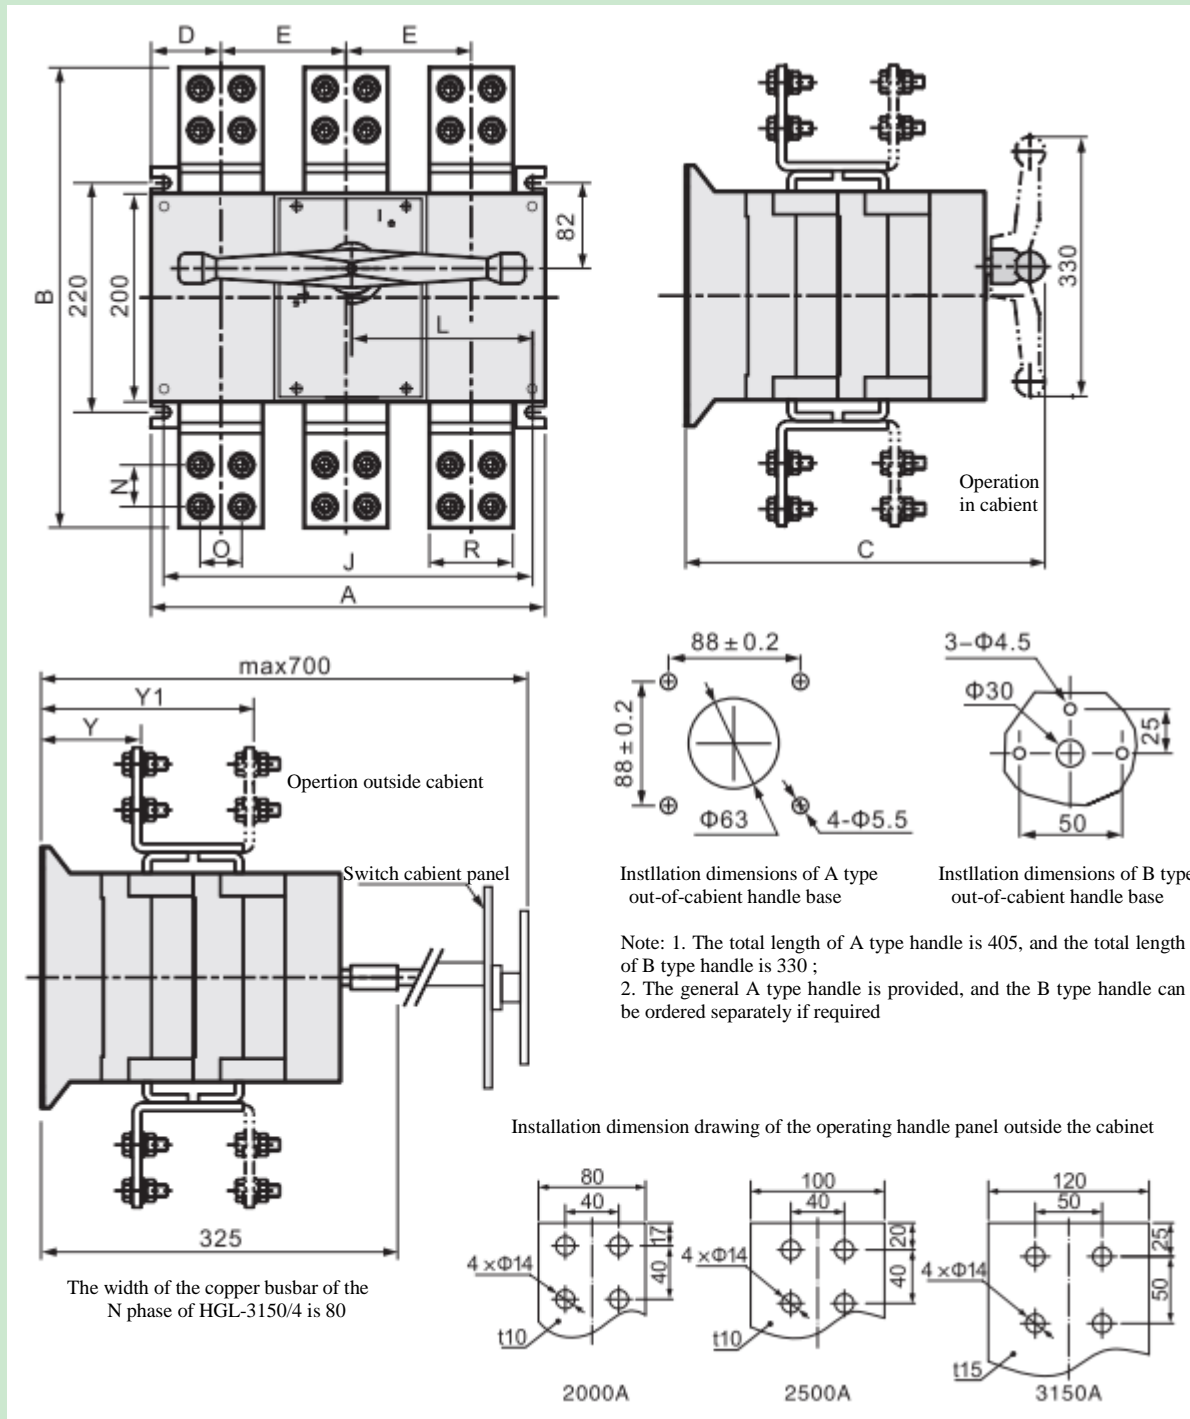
Installation dimension drawings of HGL, HGLi-2000 ~ 3150 series switch disconnector
